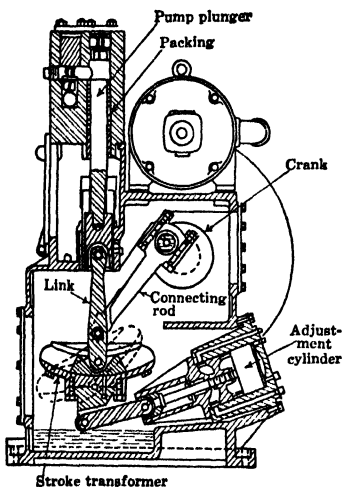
Aldrich-Groff adjustable-stroke triplex pump, shown set for zero stroke.
